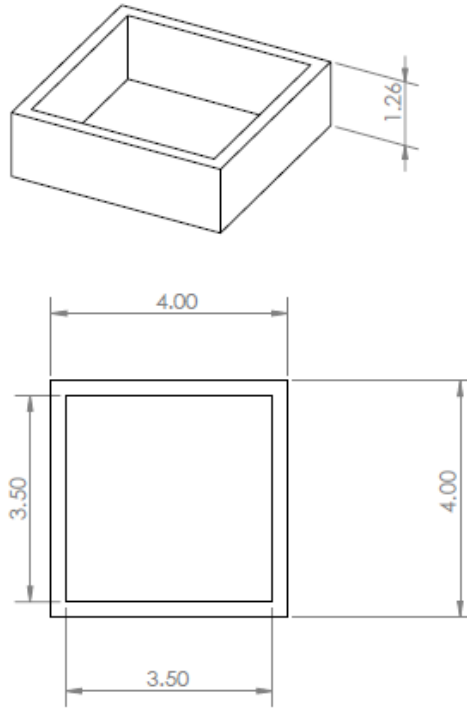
Figure G. The hollow square blocks that welded to the shield plate wherein the pistons move up and down.
